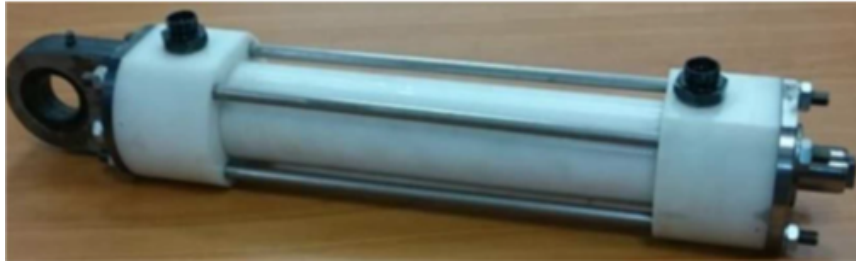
Manufacturing of the piston made of plastic (POM) by machining on lathe.
